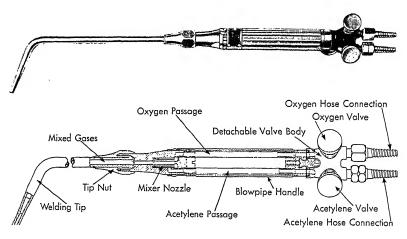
Typical medium pressure welding blowpipe (Prest-O-Weld) and schematic cross-section.
